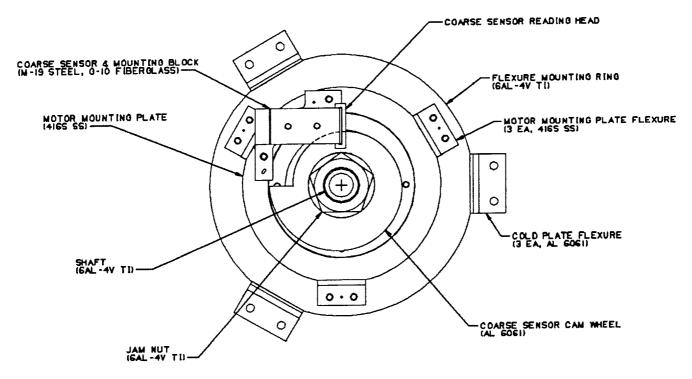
Bottom-end view of the IRS mechanism coarse sensor configuration .
